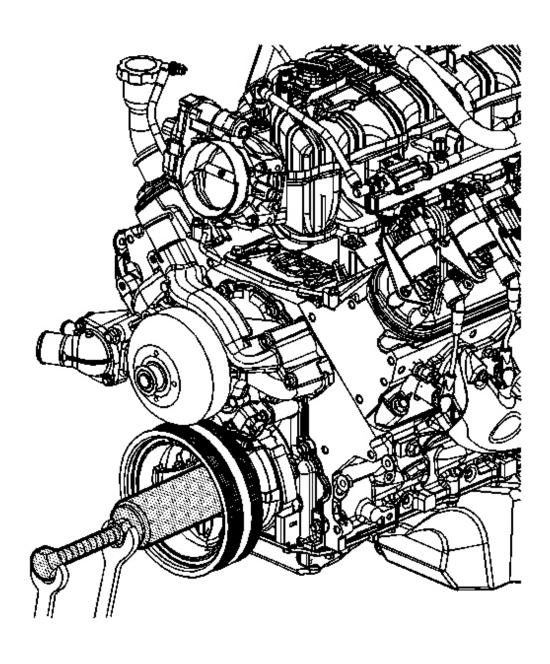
Crankshaft Balancer Bolt Courtesy of GENERAL MOTORS CORP.
